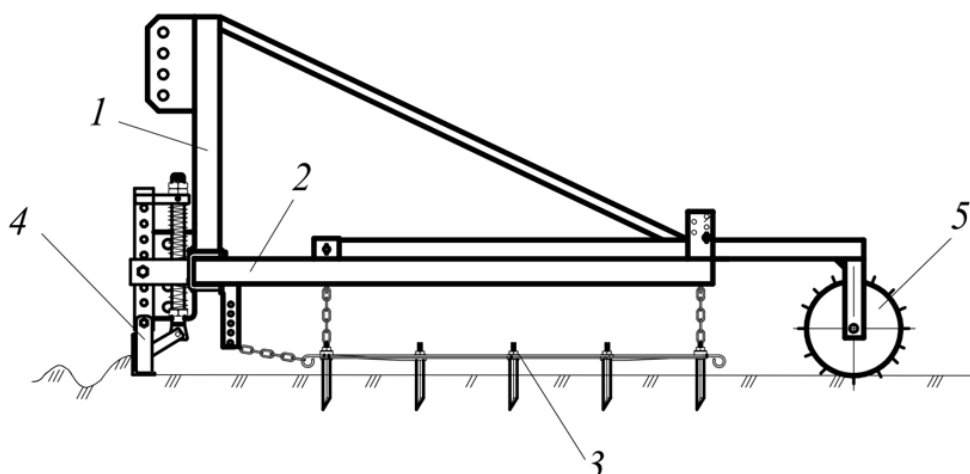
Schematic diagram of the harrow-roller: 1 – hitching device; 2 – frame; 3 – tooth harrows; 4 – levelers; 5 – plank roller.
